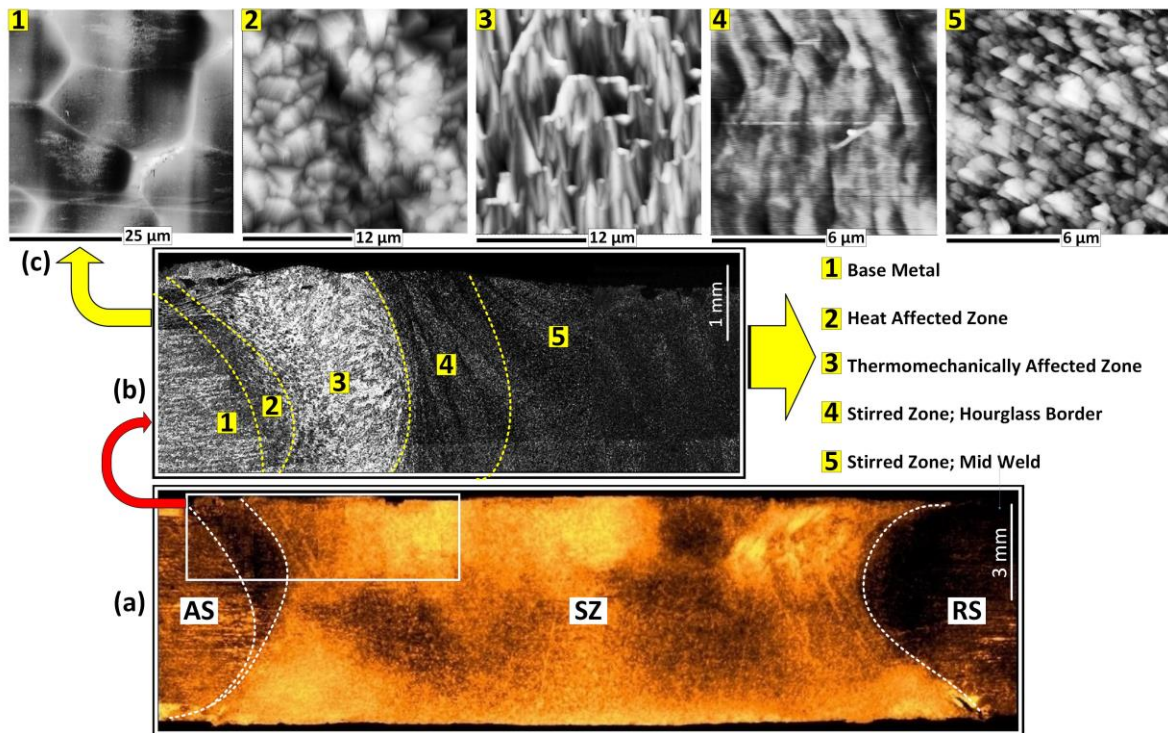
Macroscopic and microscopic features of the BFSW weld for the etched cross-section of the AA6082-T6 plate (reagent A); (a) Macro-etched cross-section of the AA6082-T6 sample, representative of the hourglass shaped weld structure, (b) the selected region from AS region at Figure 14.2a, in higher magnification, distinguishing five different regions for the weld breadth, (c) SEM images of 5 different regions of the weld texture, demonstrated in Figure 14.2b. (AS; Advancing Side, RS; Retreating Side, BM; Base Metal, SZ; Stirring Zone).
